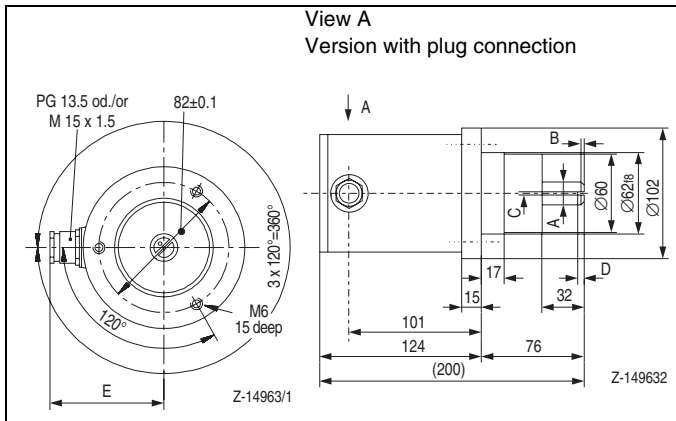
Dimensional drawing of TGM5 (-Ex) (all dimensions in mm)
